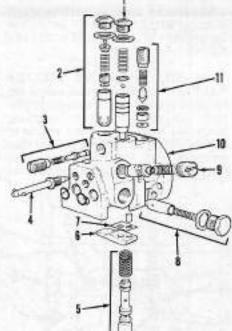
Exploded view of selectamatic control valve showing separate valve locations and related parts.
